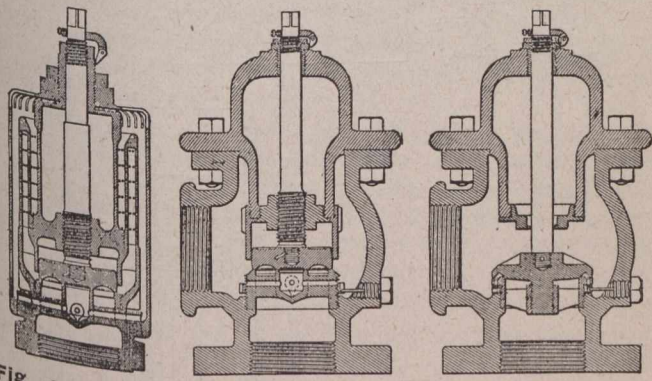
Muffled Locomotive Type. Fig. 2.—Flat-seat Inspector Type. Fig. 3.—Bevel-seat Inspector Type.
